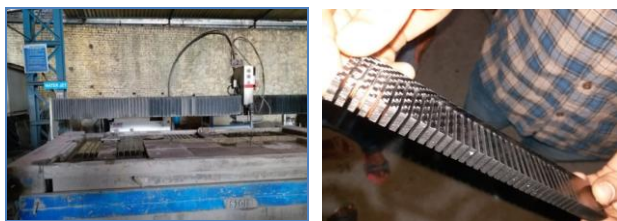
AWJM Equipment Fig. 3Machined CFRP Epoxy
